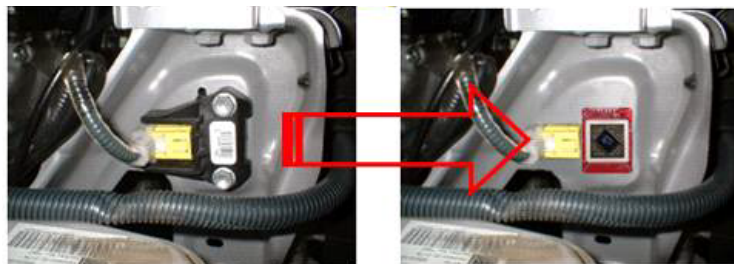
(Left) Airbag crash sensor module by mechanical assembly, (Right) Conceptual drawing of flexible sensor(Shinyoung co., LTD)
